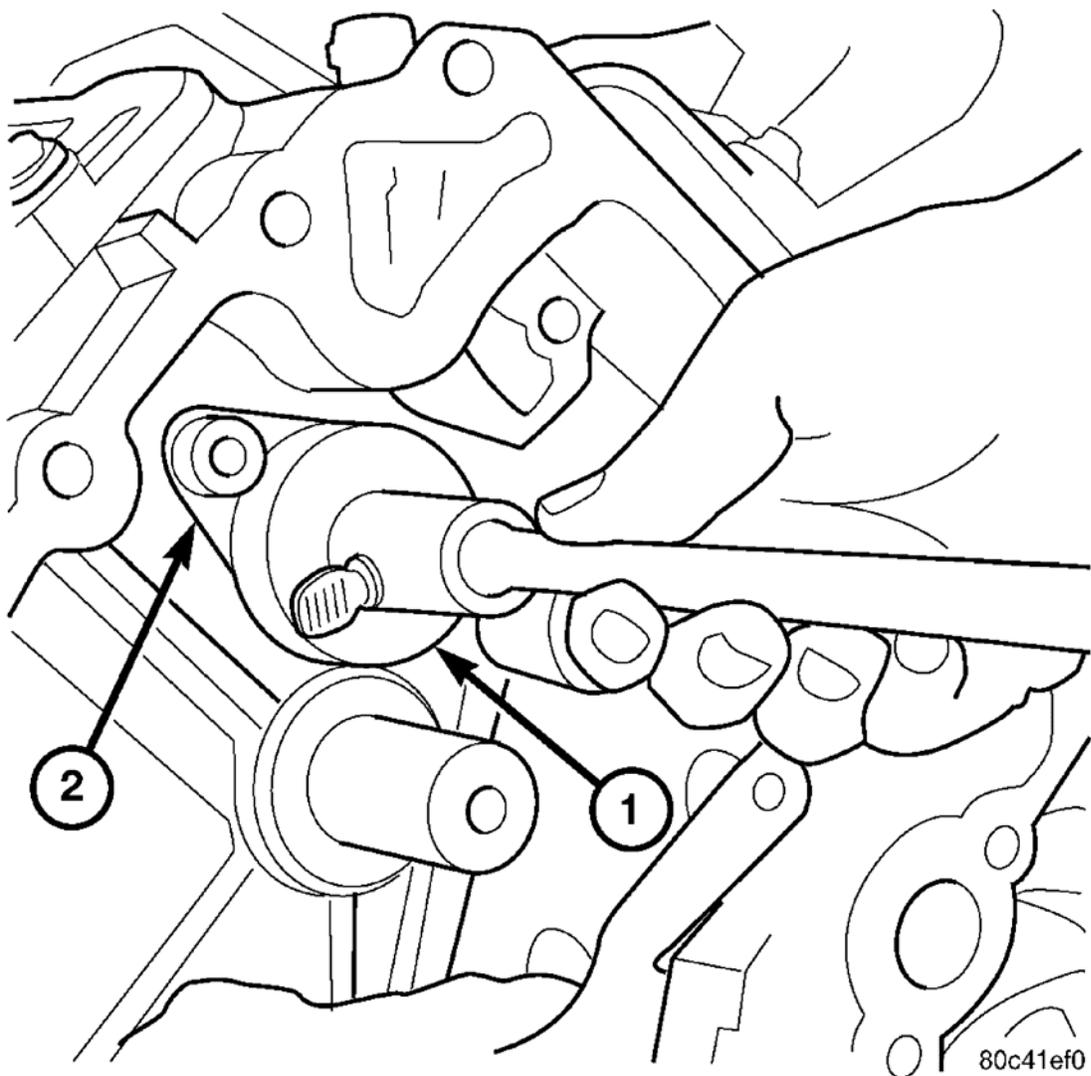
Counterbalance Shaft Removal/Installation Tool
